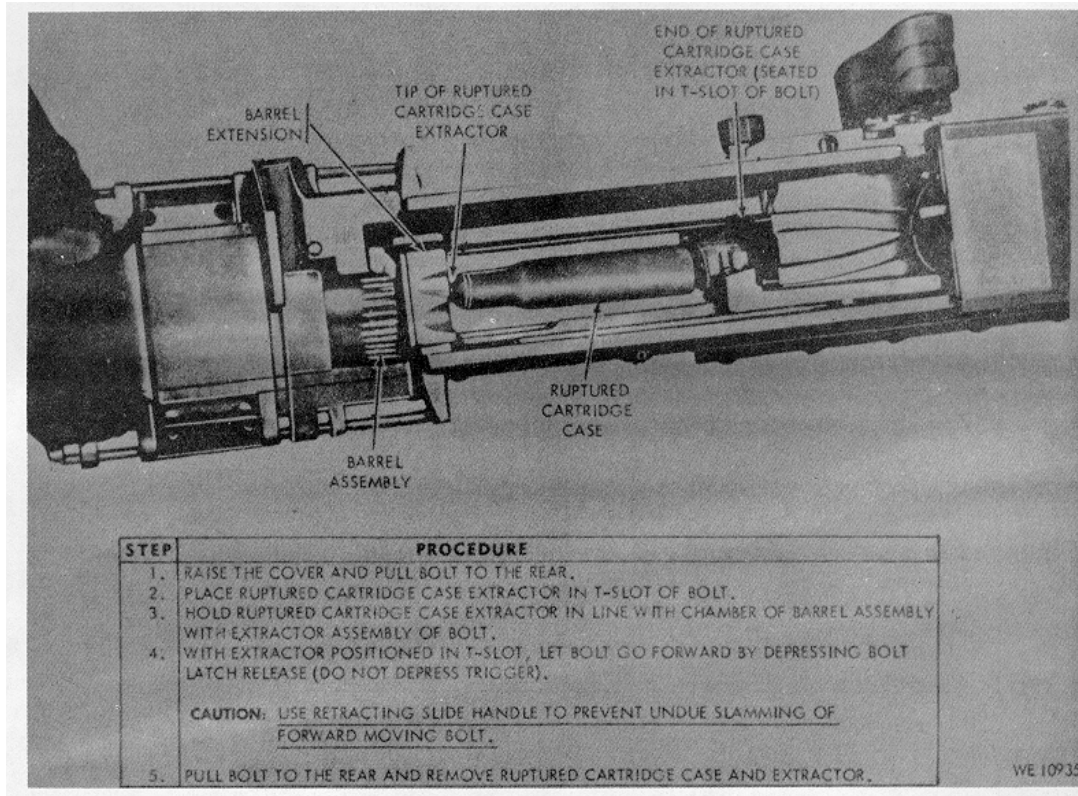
Remove ruptured cartridge case from chamber of cal. .50 machine gun
